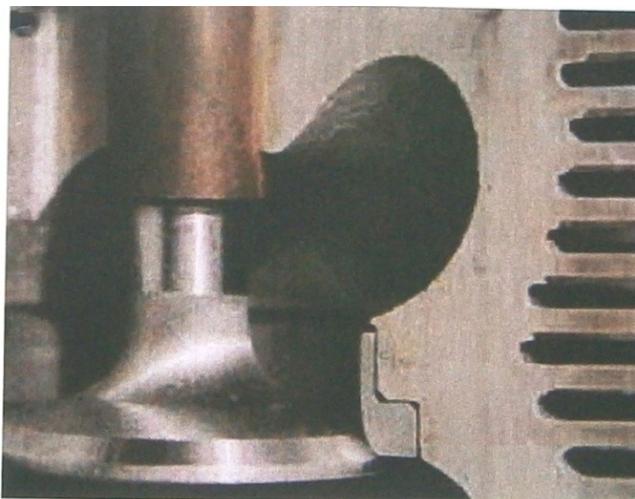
Lycoming "morning sickness" is caused by buildup of exhaust deposits on the exhaust valve stem and inside the exhaust valve guide. The cure is to clean the valve stem and ream the valve guide, something that can be done without removing the cylinder.
